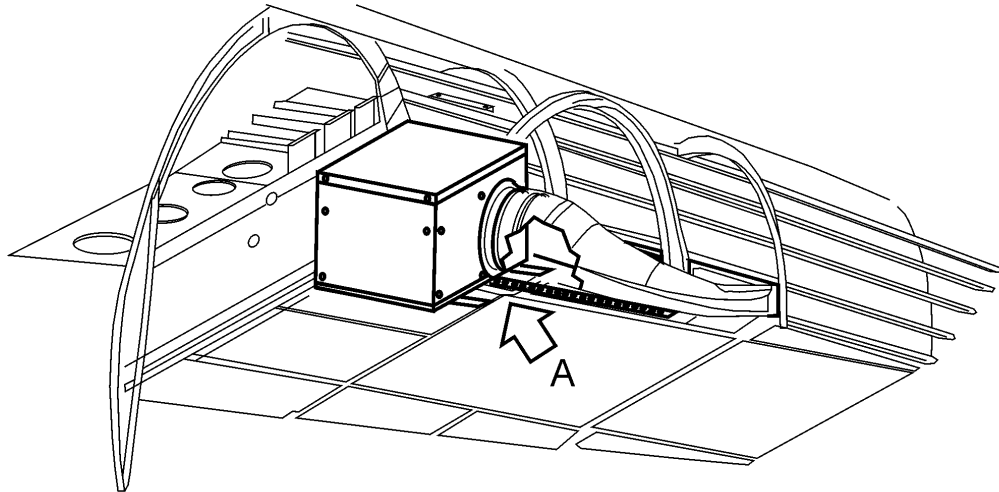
Compressor/Condenser - Removal/Installation (Sheet 4 of 6)
